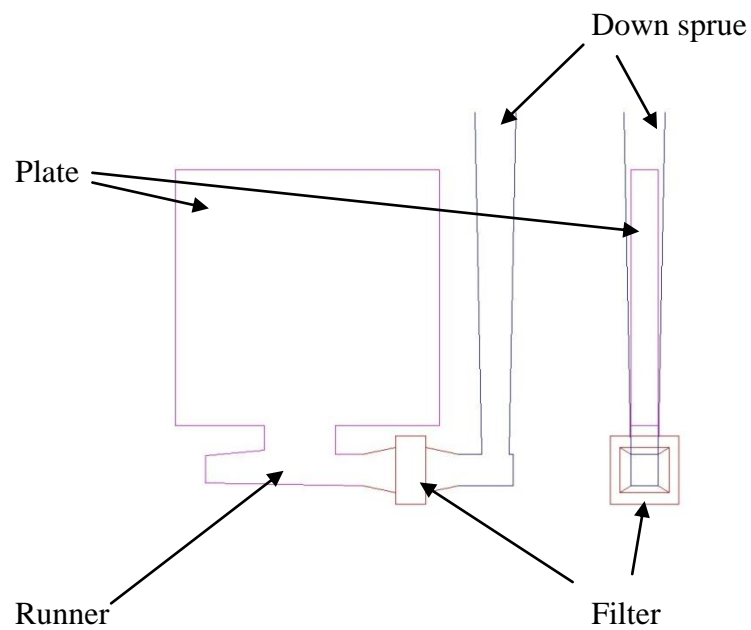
Filtered mould design , showing plate, filter, downsprue and running system.
